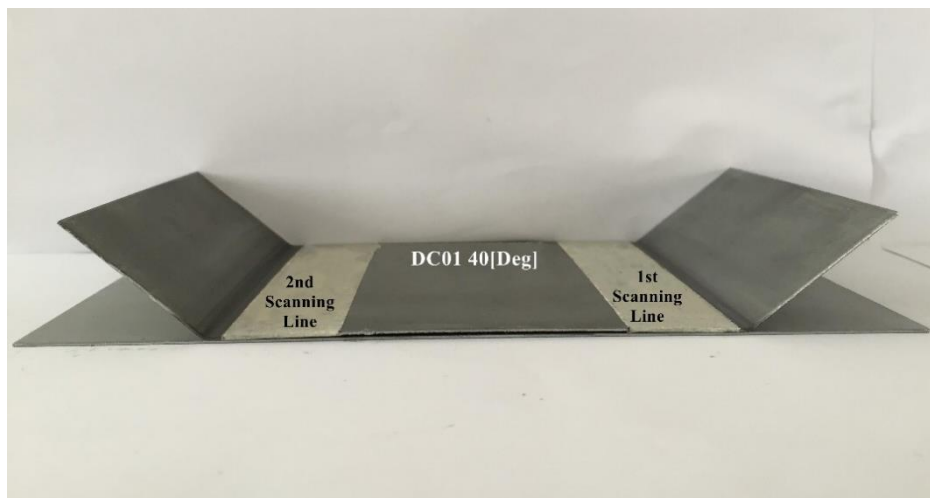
Mild steel DC01 final formed “U” shape component with 40° bending angle
